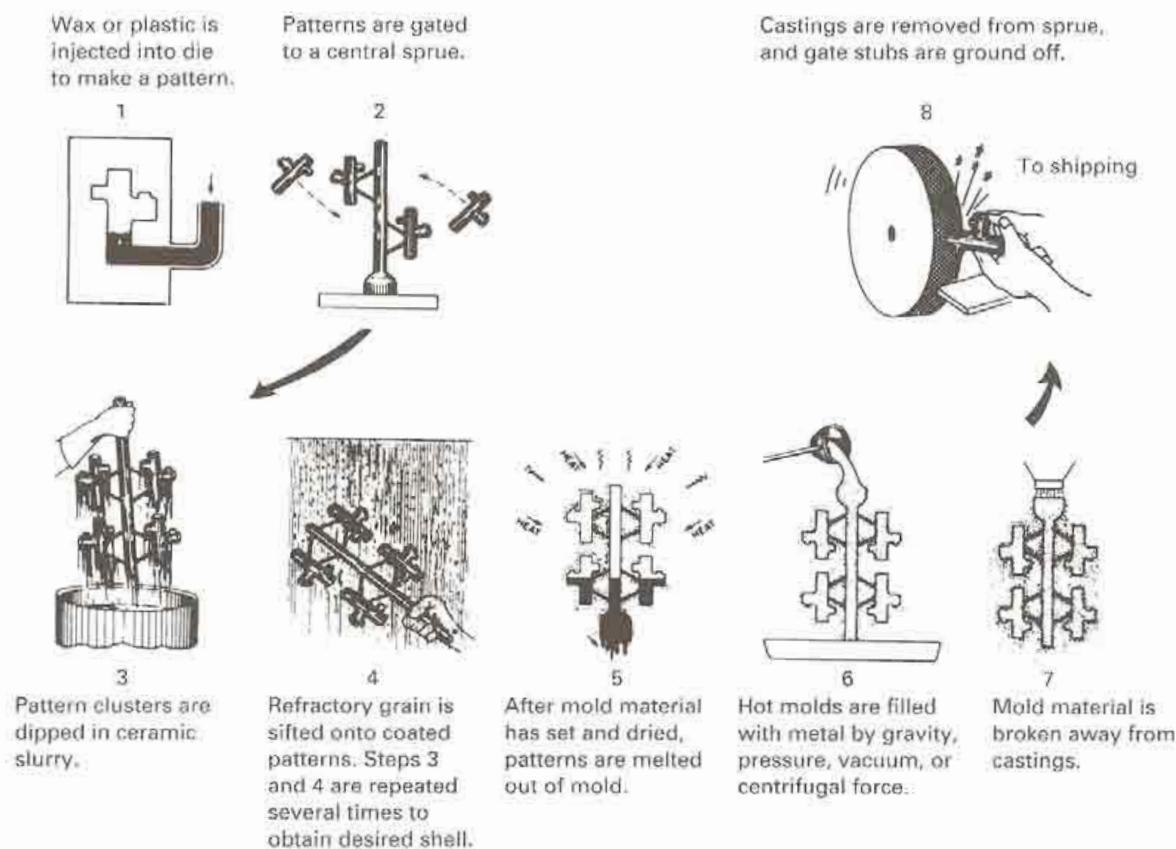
Investment-casting steps for the shell-casting procedure. (Courtesy of Investment Casting Institute, Dallas, TX.)
